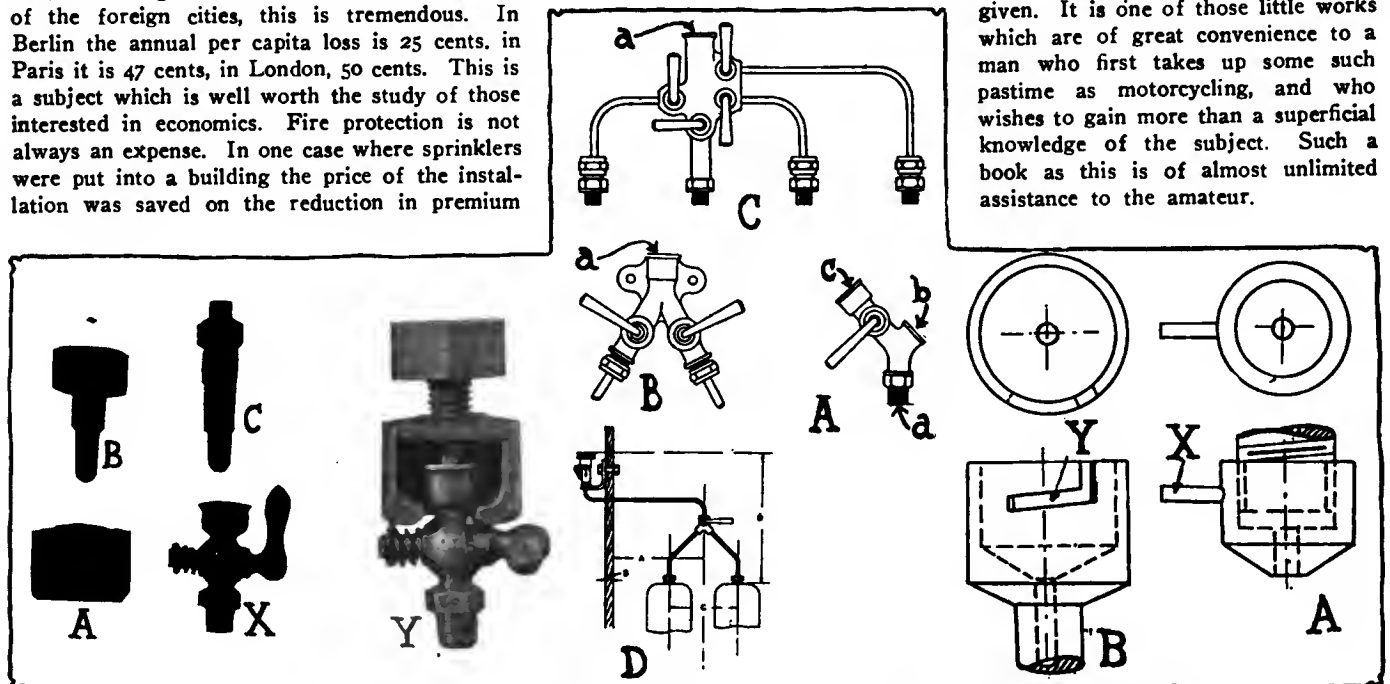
Fittings used in connection with the O'Kil Indicator for dash attachment, manifold attachment, etc.
